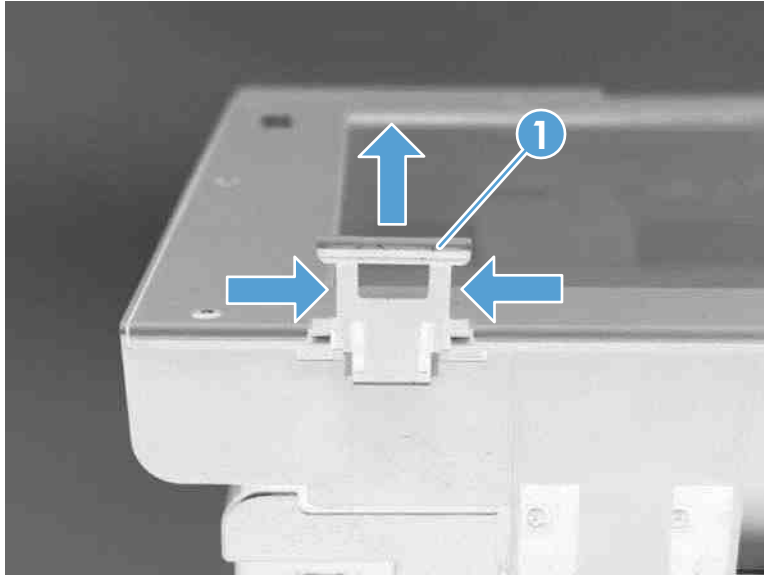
Remove the document feeder base assembly (4 of 4)
